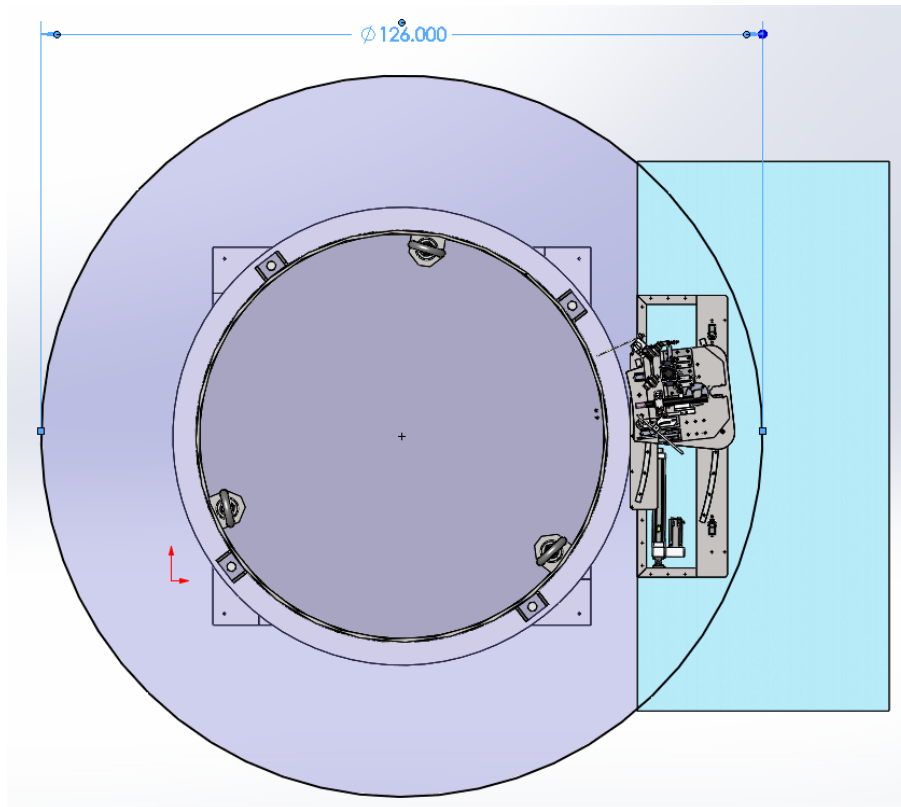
Top view of the canister and VRM layout. The large circle indicates a simulated boundary (dimensions in inches).
